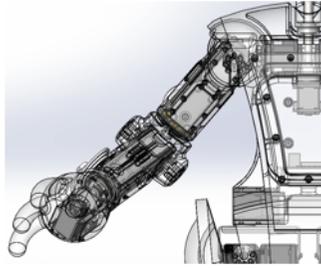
Detail of Super Jimmy's shoulder and arm
